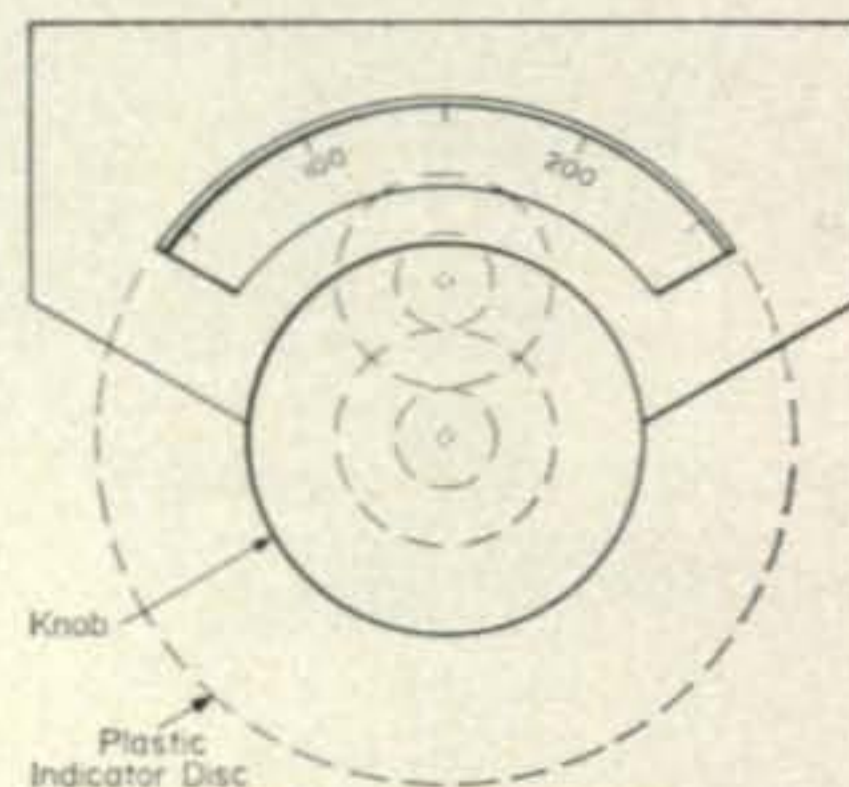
Shape of front panel bezel is shown above along with a concentric view of the gearing arrangement.
